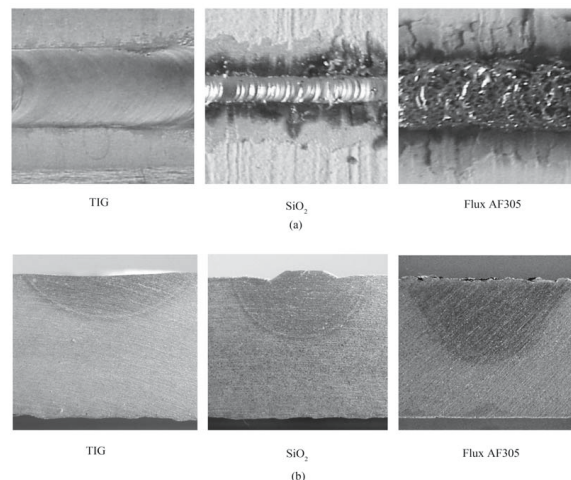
Effect of activating fluxes on weld morphology of aluminum welds(33). (a) Surface appearance and (b) Cross-section appearance
